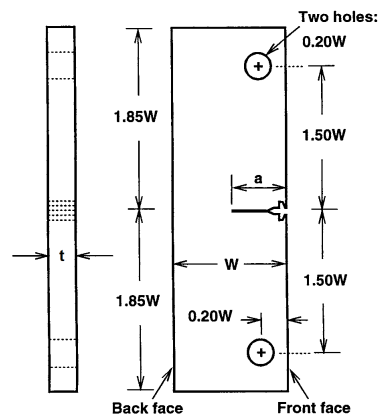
Standard eccentrically-loaded single edge crack tension specimen [39]
